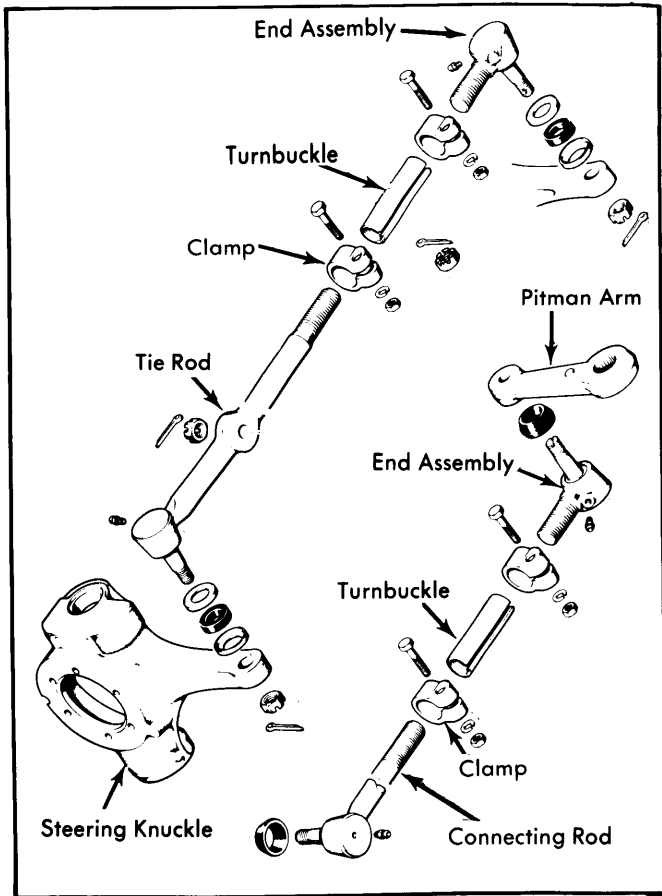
Disassembled View of Steering Linkage (Cherokee, Wagoneer & Truck Models)
